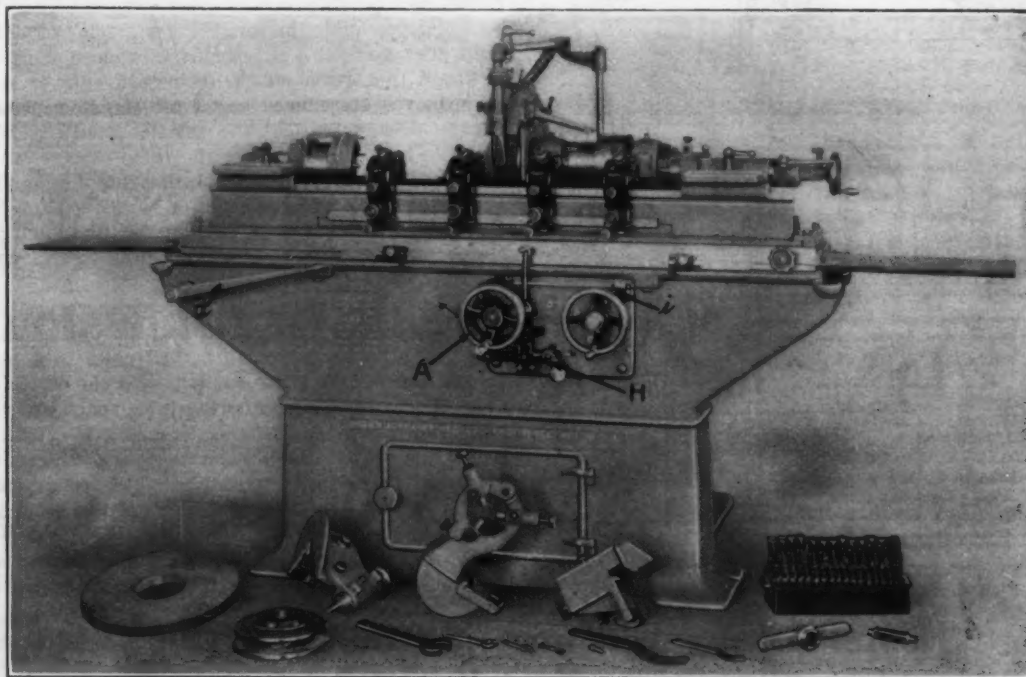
Front View of the No. 12 Plain Grinding Machine Built by the Brown & Sharpe Mfg. Company, Providence, R. I.
